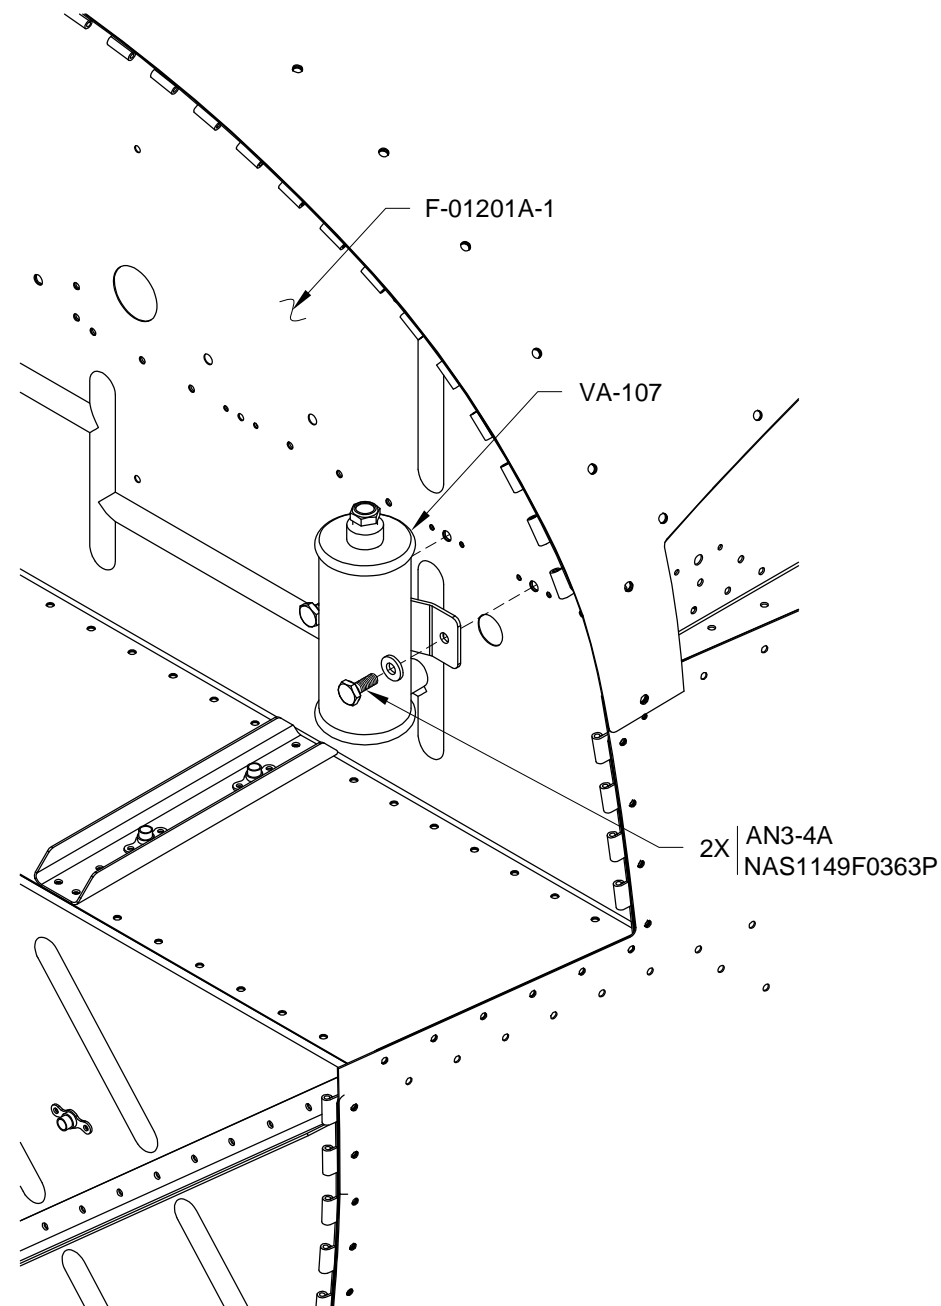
ATTACHING THE BRAKE RESERVOIR
